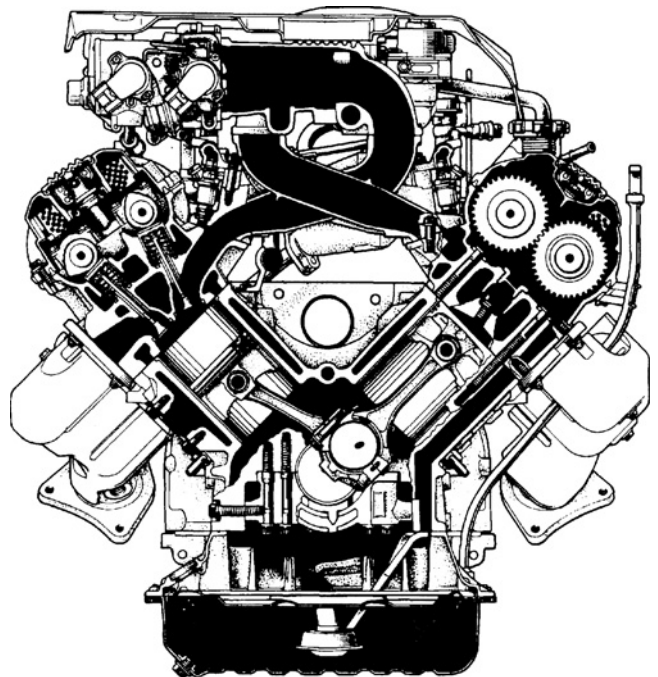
Vertical and transverse fastening for the main bearing caps in a high-grade V eight-cylinder engine (Lexus/Toyota)
